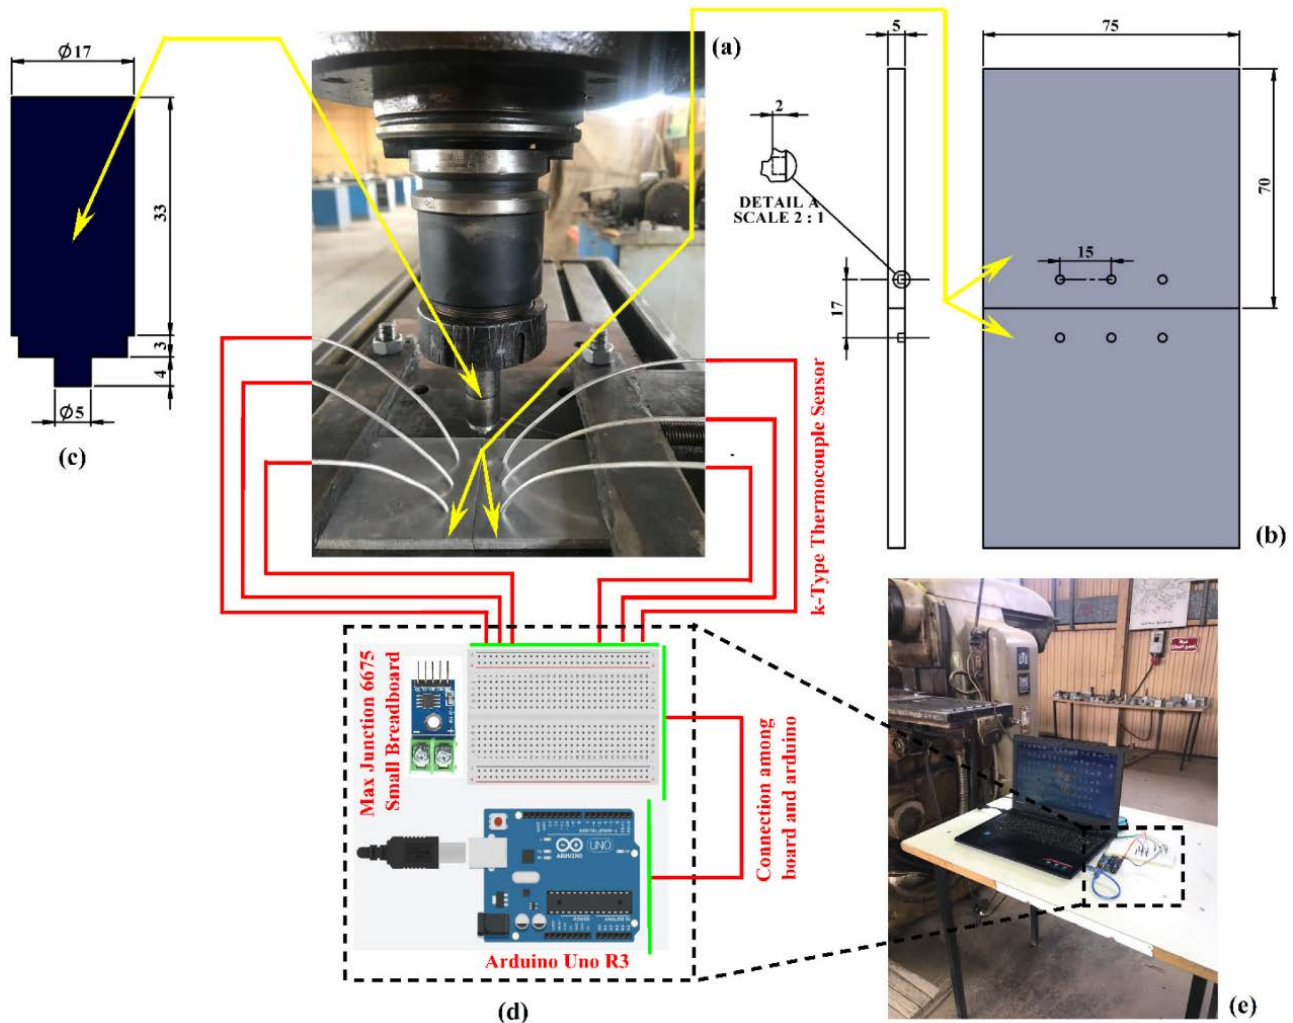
FSW operation environment of Al 6061-T6: (a) Setup of work materials and thermocouple sensors, (b) Workpiece dimensions, (c) Pin tool dimensions, (d) Connection configuration for Arduino-Max Junction-small breadboard with workpiece by K-Type thermocouple sensors, (e) Connection configuration between Arduino and computer
